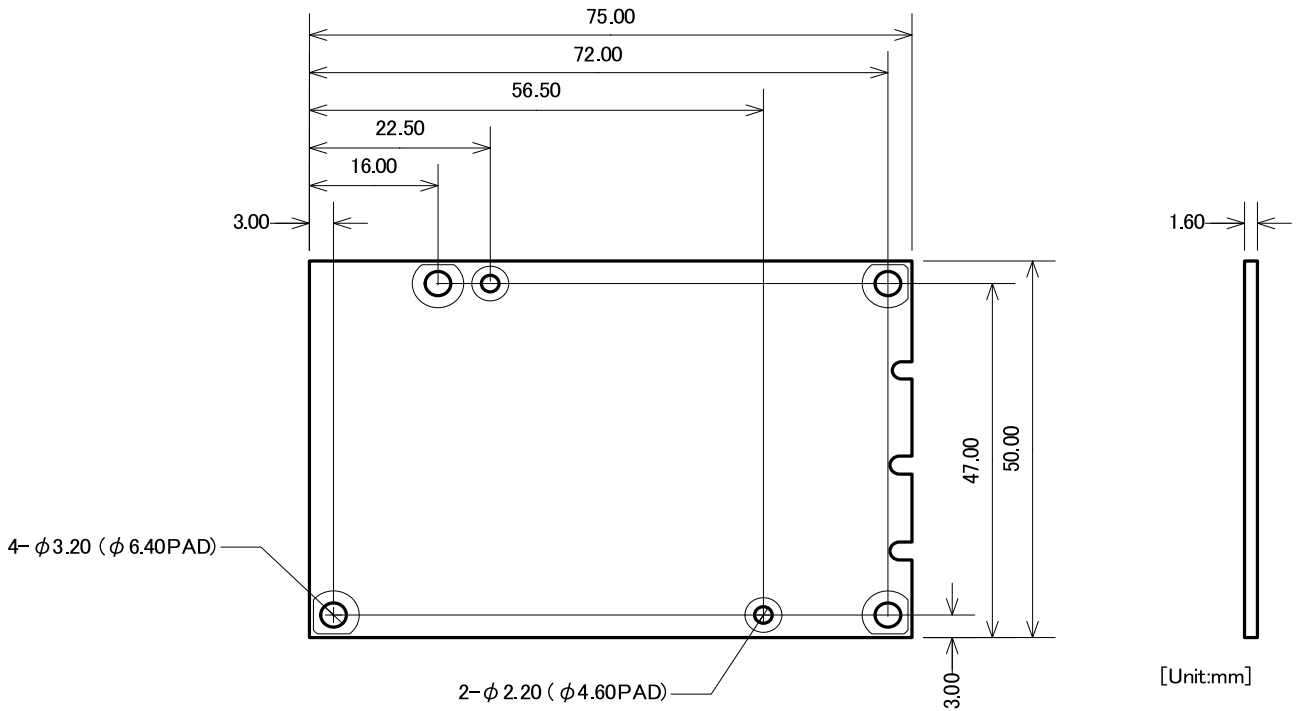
Armadillo-420 Board Outline and Fixing Hole Measurements
